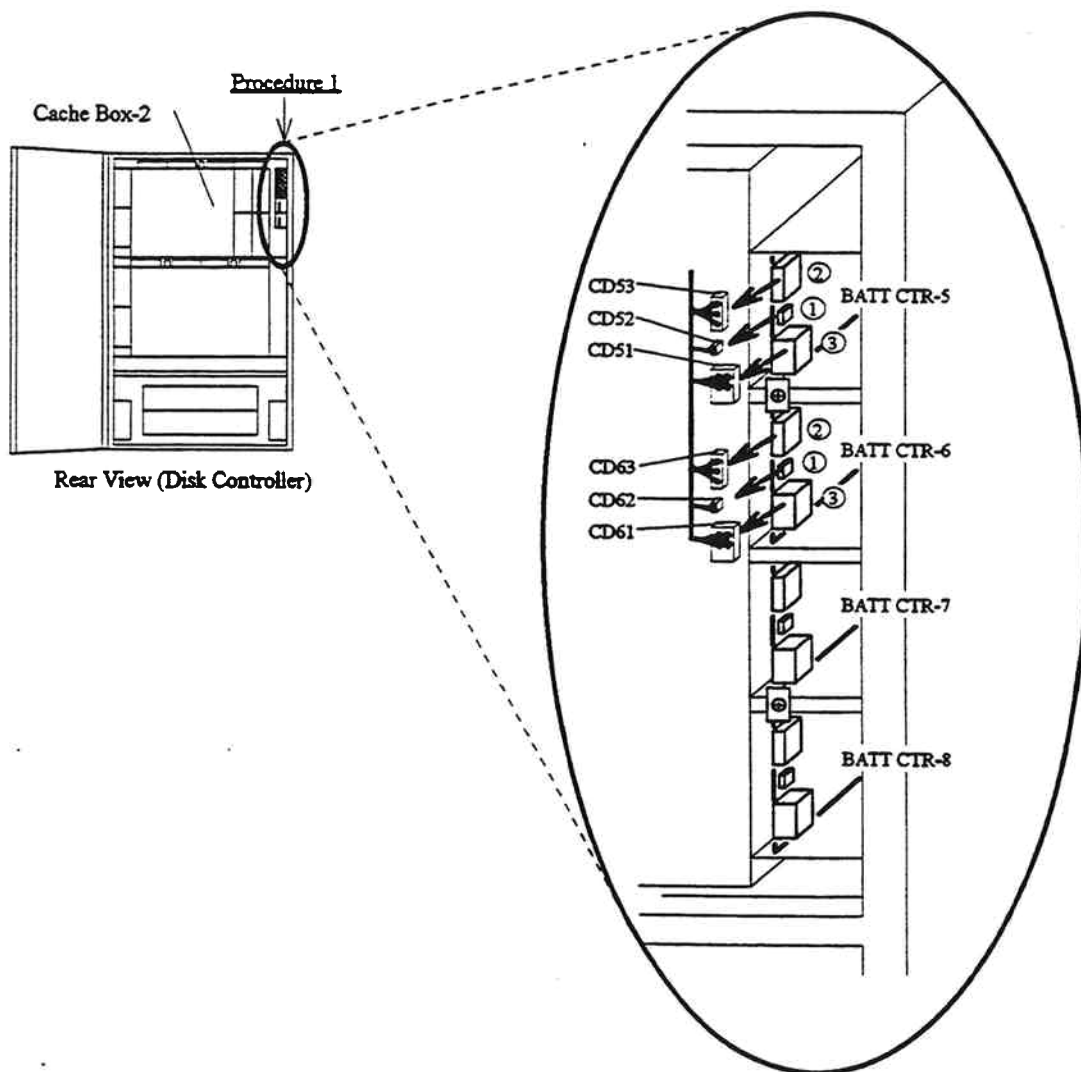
Disconnection of the Cables
